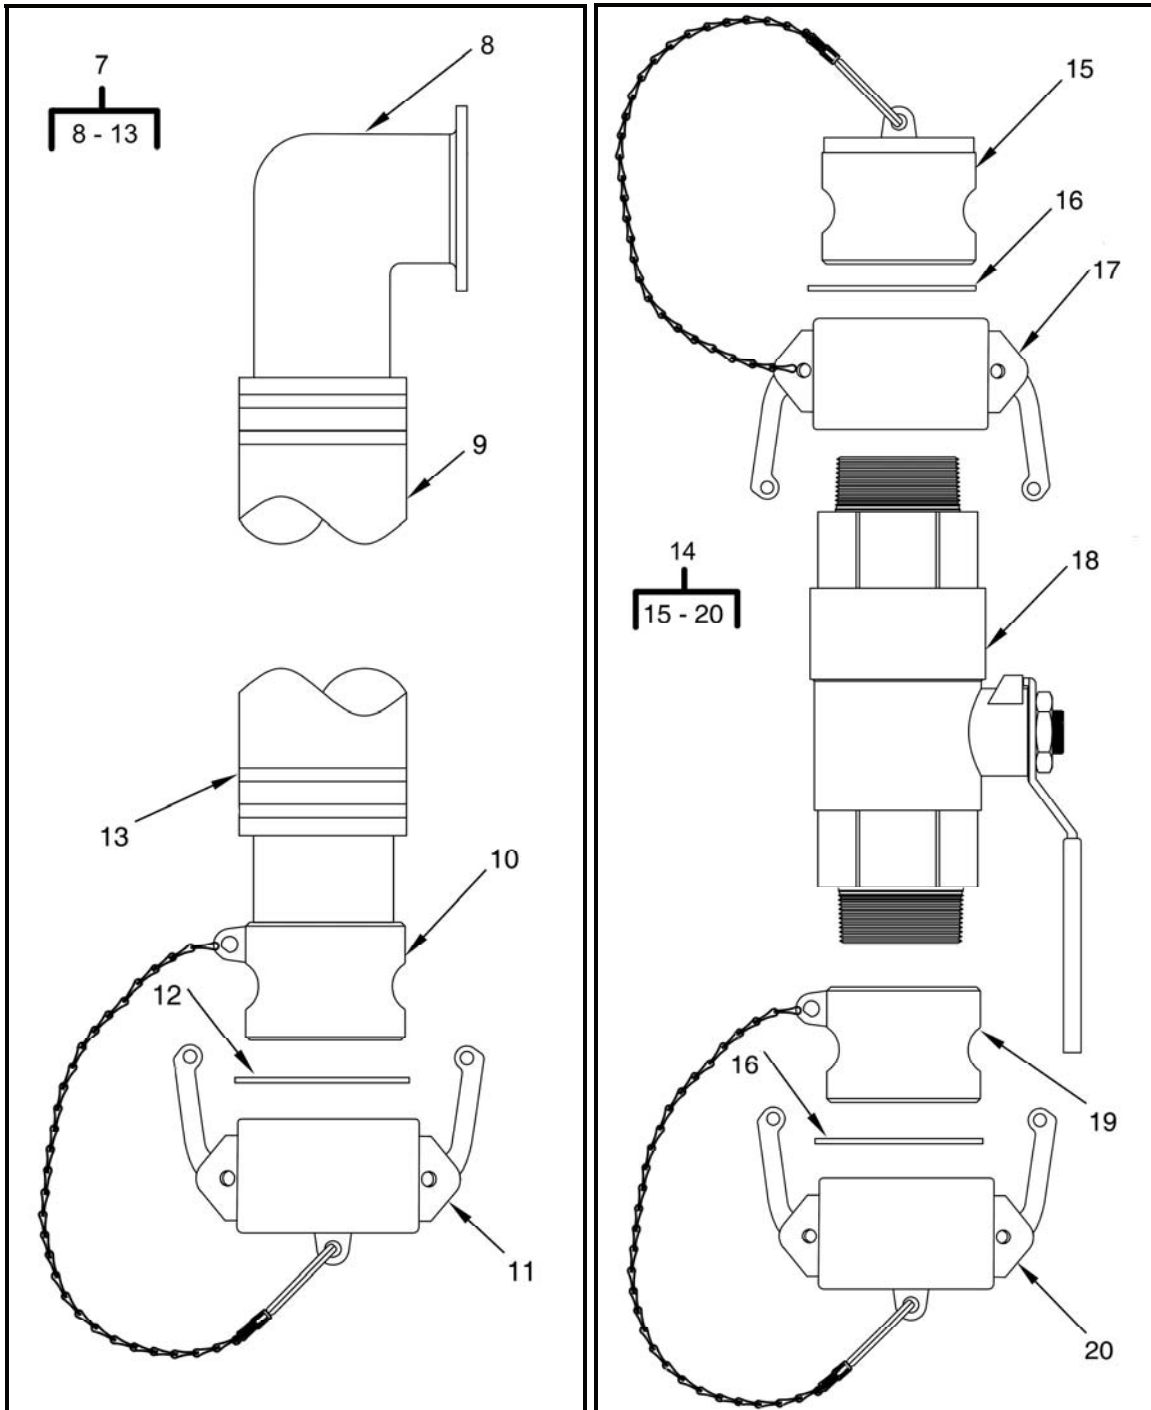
(Sheet 2 of 2) Berm liner Assembly
